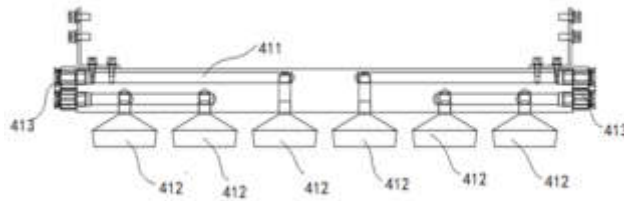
Schematic diagram of the dust removal assembly of the inner chain plate
